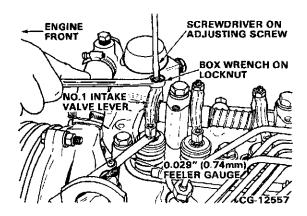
Adjust #1 Intake Valve Lever to .029" Clearance
